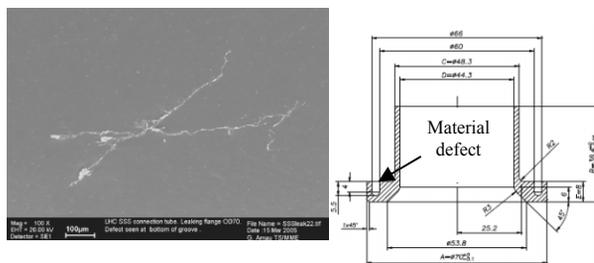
X-shape material defect (left) and localisation of the material defect in the flange (right).
